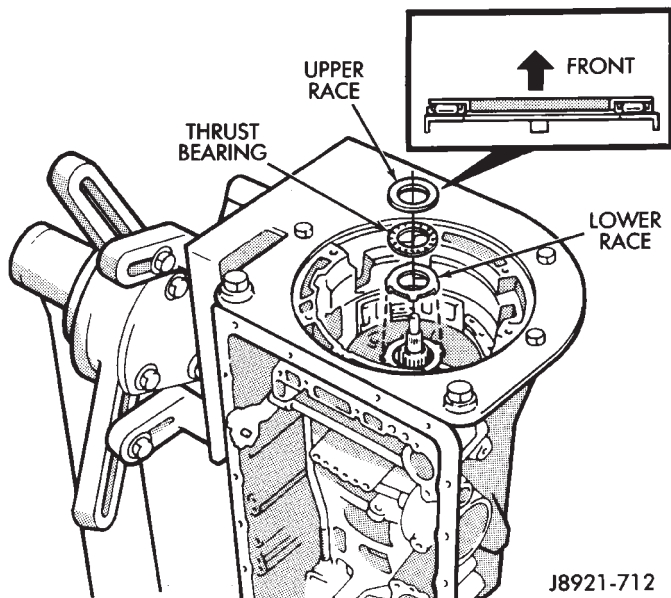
Installing Overdrive Support Thrust Bearing And Races
